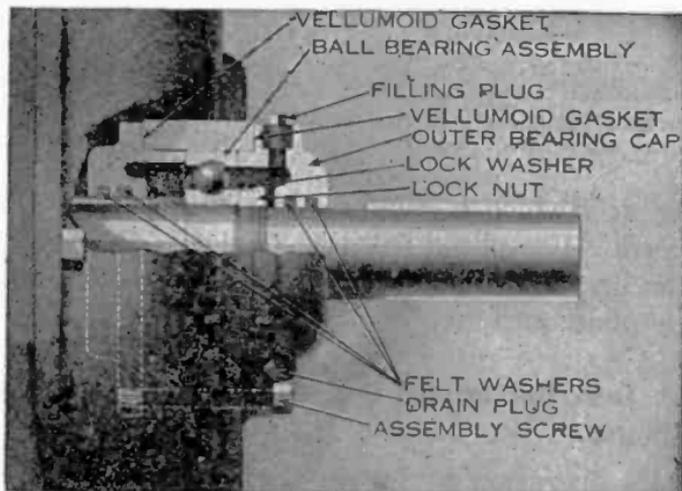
,541.—*Reliance induction motor construction 8.* Bearing mounting.
